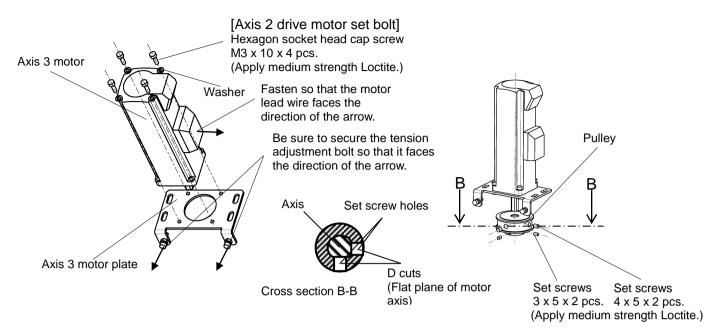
Mounting axis 3 pulley and plate (KHL-300, KHL-400)
